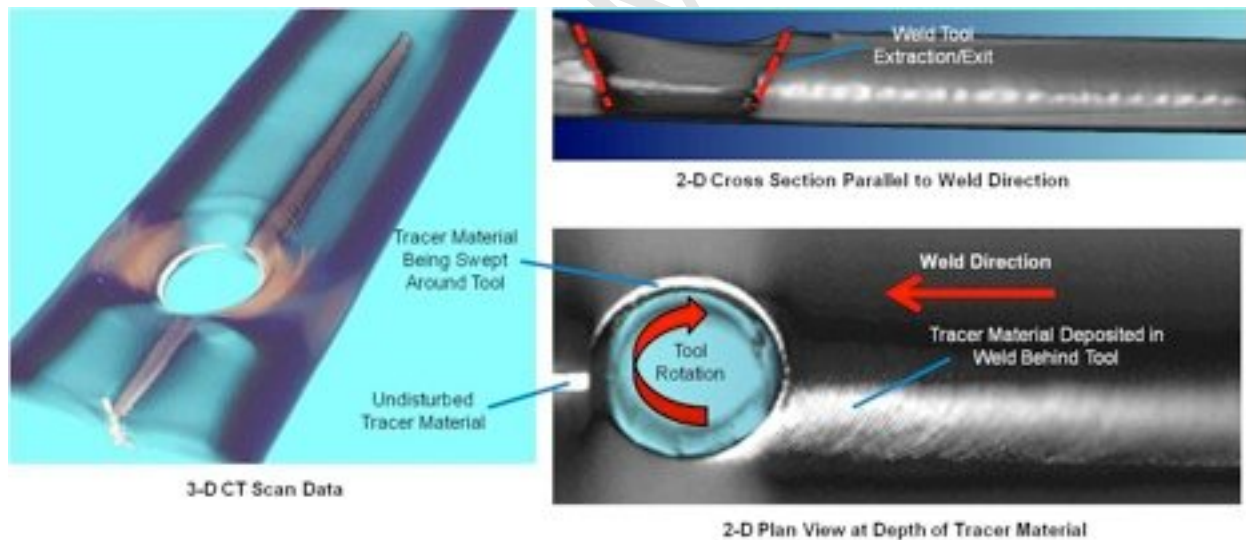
CT scans of a weld made at 300 RPM and 150 mm/min.
